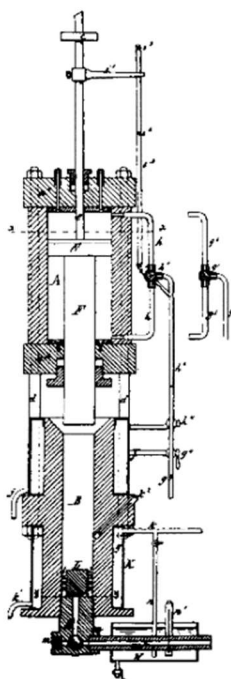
Patent application of Hyatt's injection molding machine. [3]
